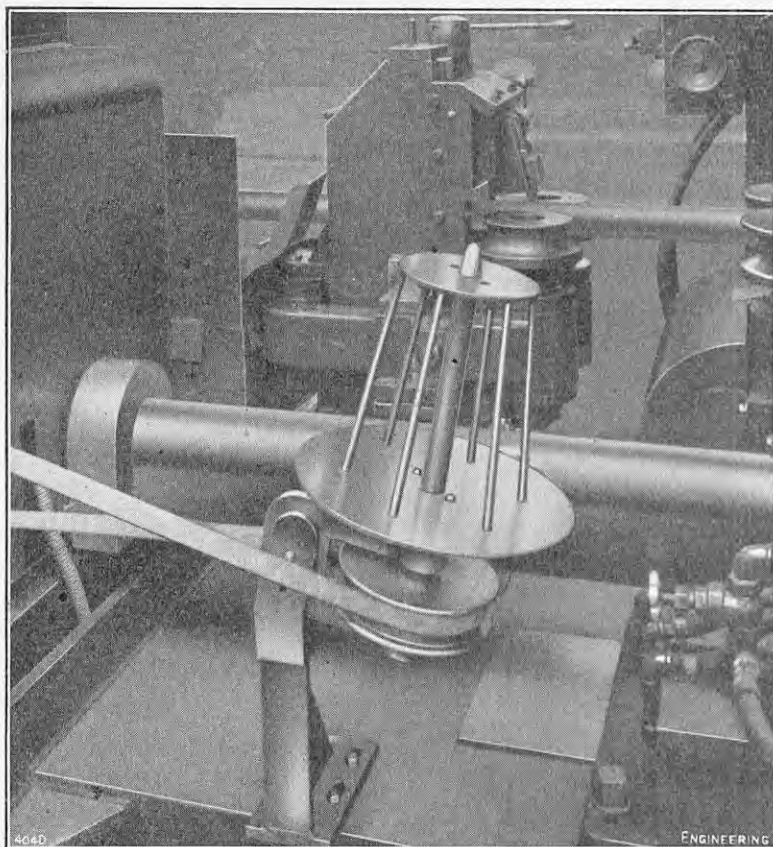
COILING DRUM FOR WELD FIN.
